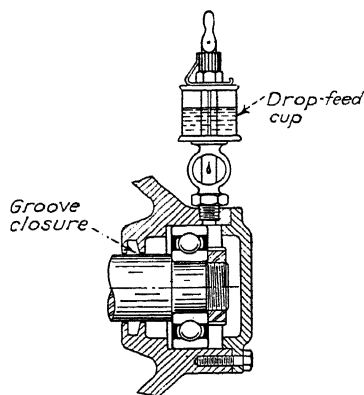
Sight drop-feed oilers applied to a ball bearing.
